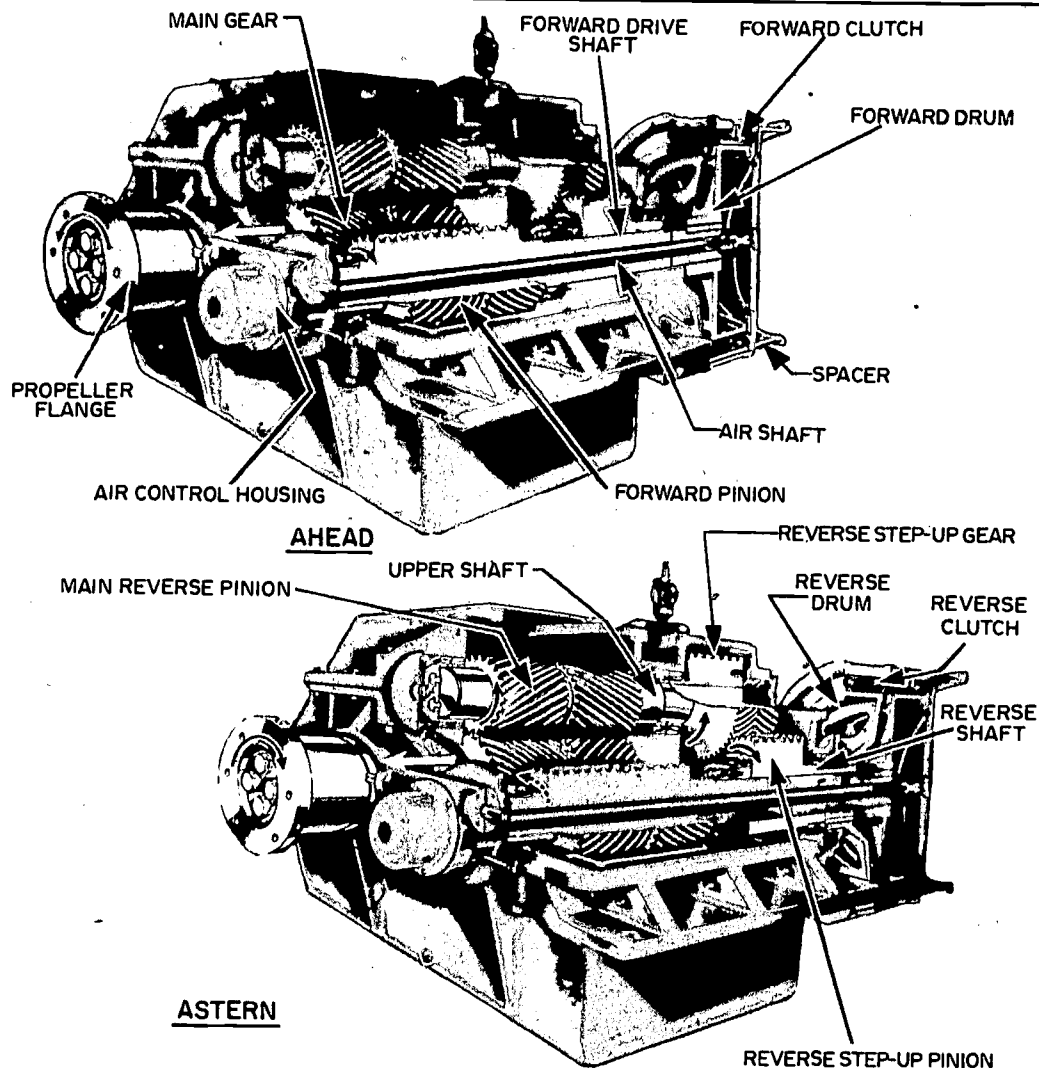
Clutch and reverse-reduction gear assembly.
